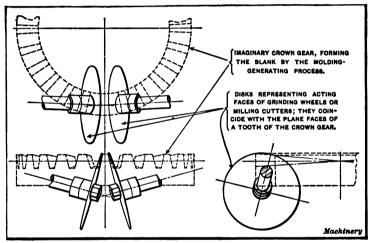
Diagram suggesting Arrangement of Milling Cutters or Grinding Wheels for Forming the Teeth of Bevel Gears by the Molding-generating Process
